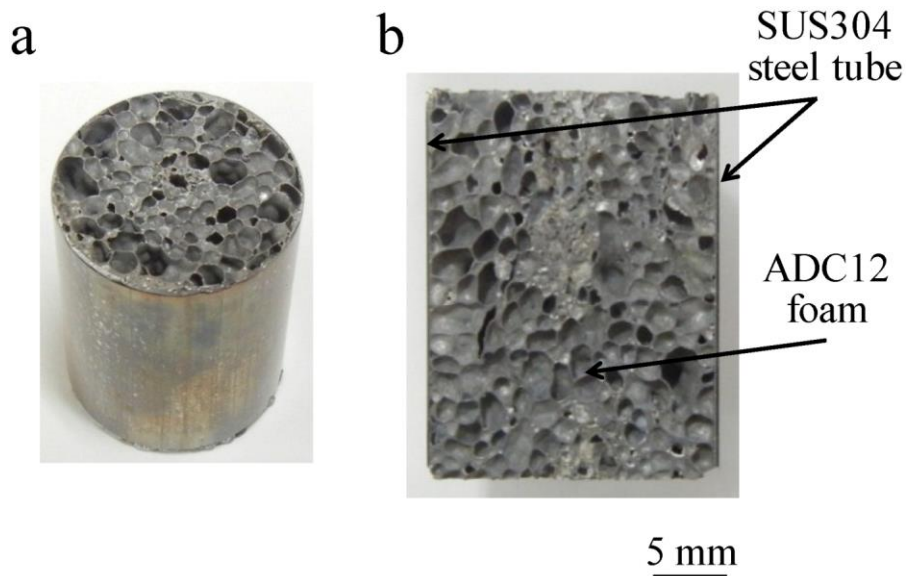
Fabricated Al foam-filled steel tube: (a) Compression test specimen; (b) Cross-sectional image of (a) [75].
